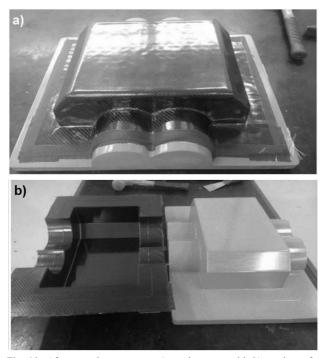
After autoclave process: a) product on mold, b) product after removing from mold
